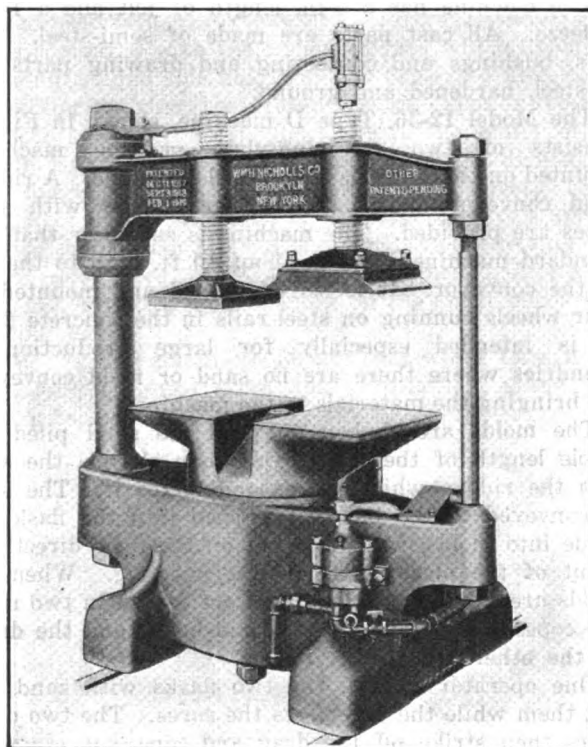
NICHOLLS 14-42 PORTABLE DUPLEX MOLDING MACHINE
